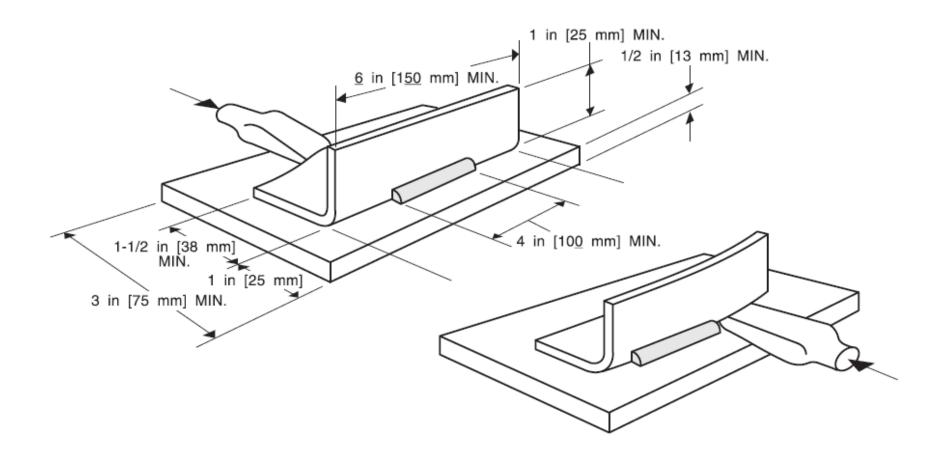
Standard Test Assembly for Flare-Bevel-Groove Weld;
